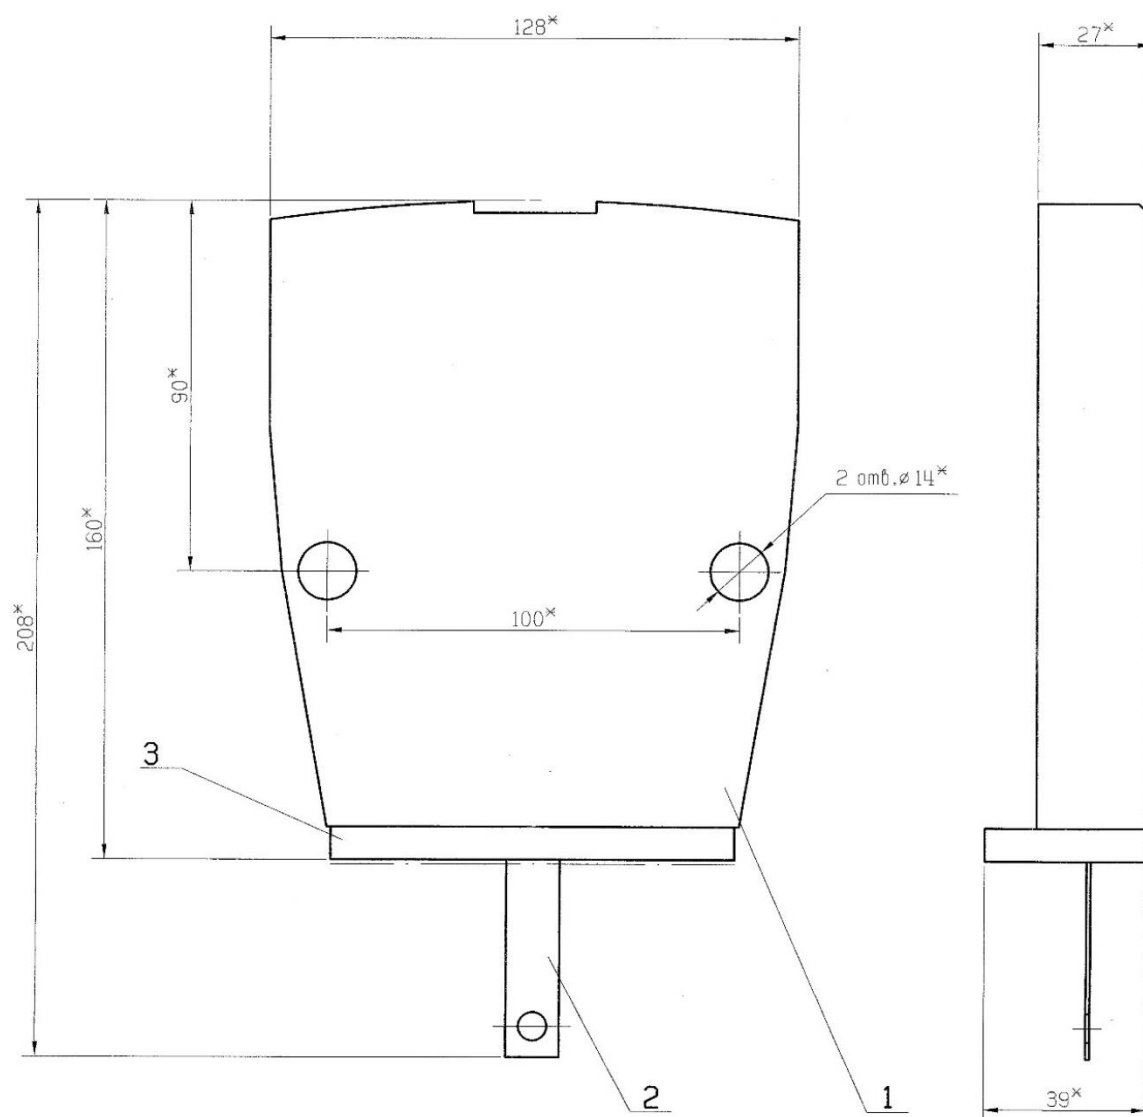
Approximate dimensions of the RC filter unit housing.
